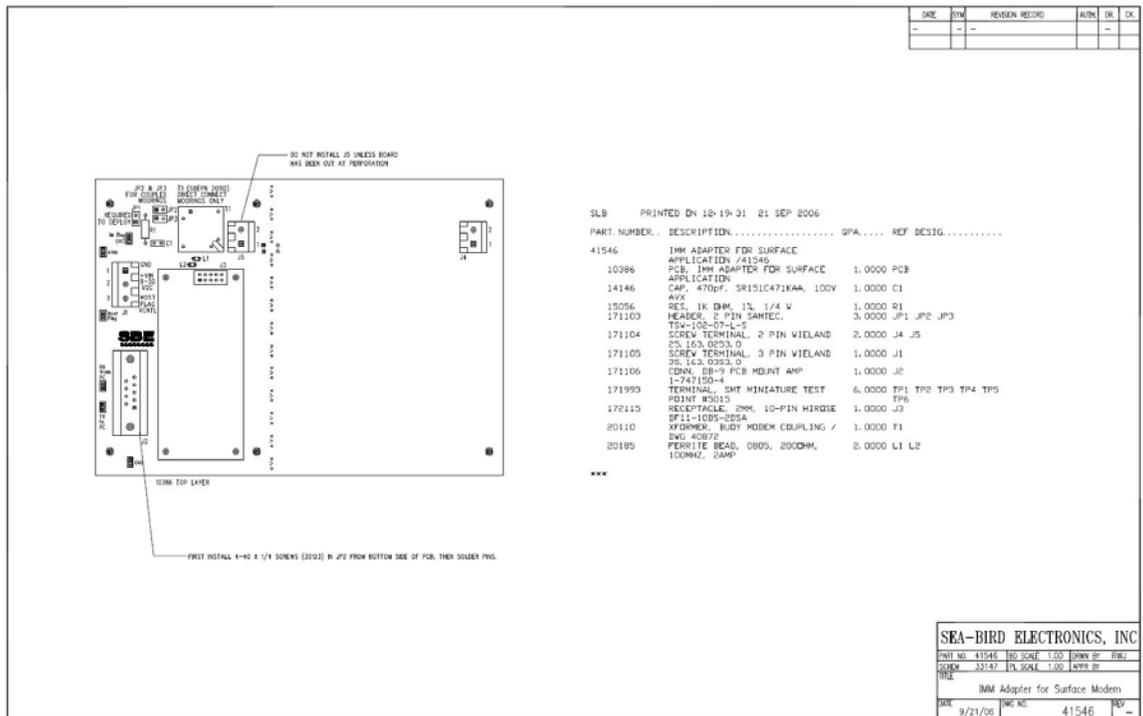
IMM adapter board seabird part number 41546. Note the board is perforated and only the left side of the board is used.
